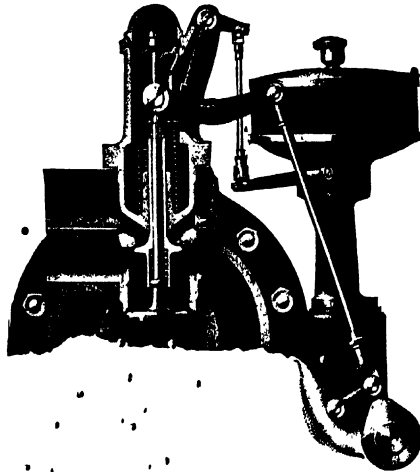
INLET VALVE OF GAS-ENGINE SHOWING "LIFT" AT LIGHT LOAD. [Crossley.]
